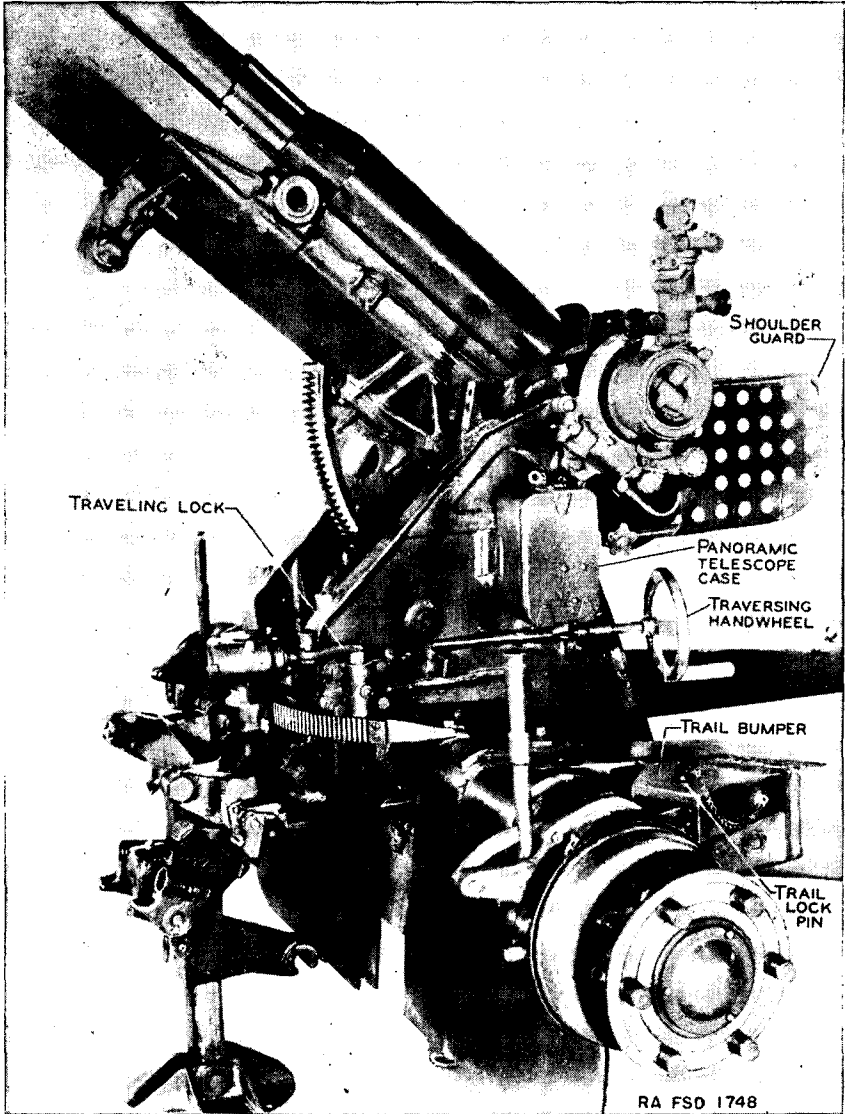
75-mm gun carriage M2A2 with shield and wheels removed, left side view.
